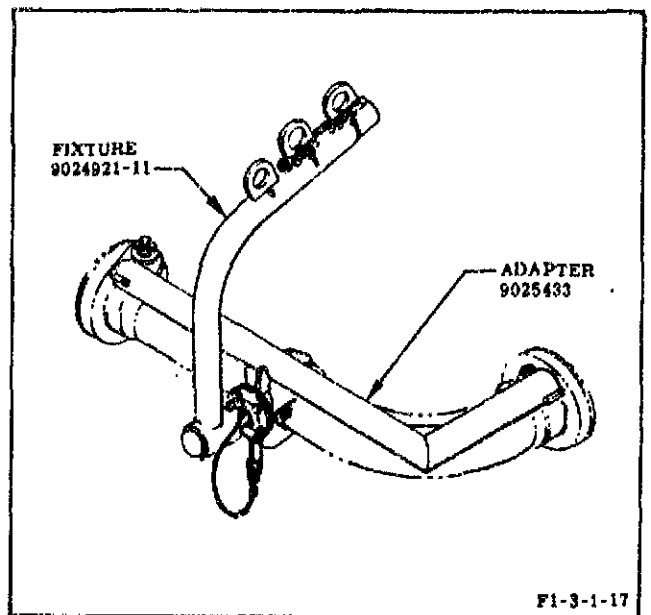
Handling No. 1 Oxidizer High-Pressure Duct
